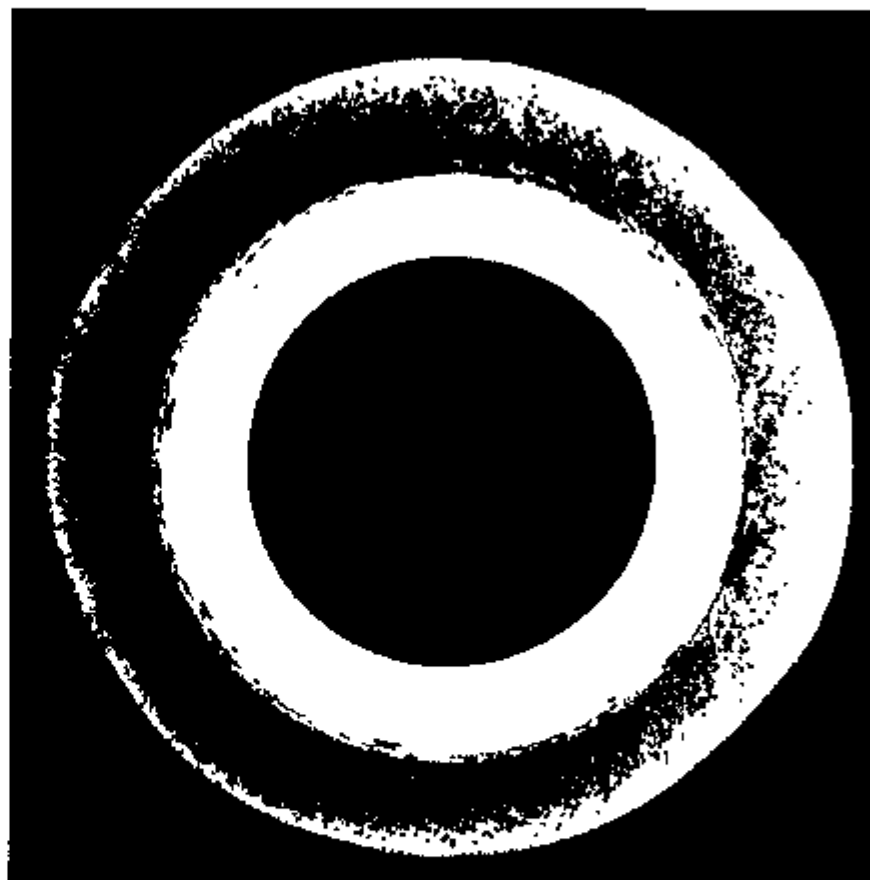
CT slice (0.5 mm thick) of the exhaust manifold 129 mm from bottom end.
